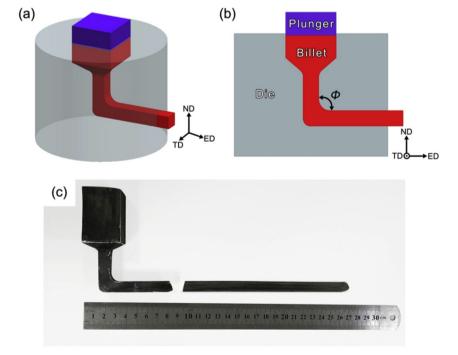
Schematics of IEECAP die and the corresponding workpiece extracted from the die after a single pass extrusion, (a) iso-view, (b) side-view and (c) macrograph of the workpiece processed by IEECAP.
